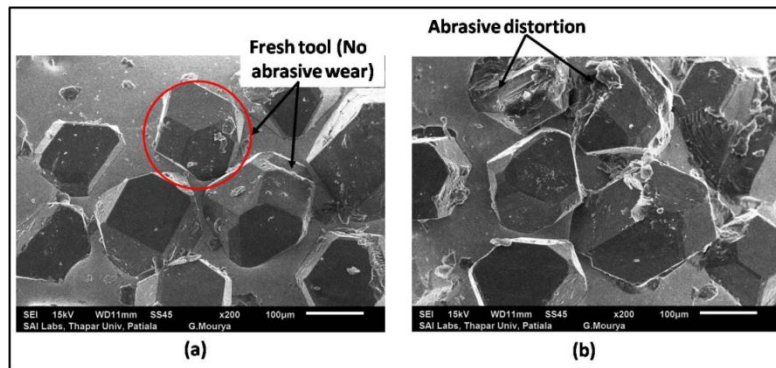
Illustration of grain particles on tool face. (a) Fresh tool with no abrasive grain wear, and (b) Used tool after performing CD process showing abrasive distortion
